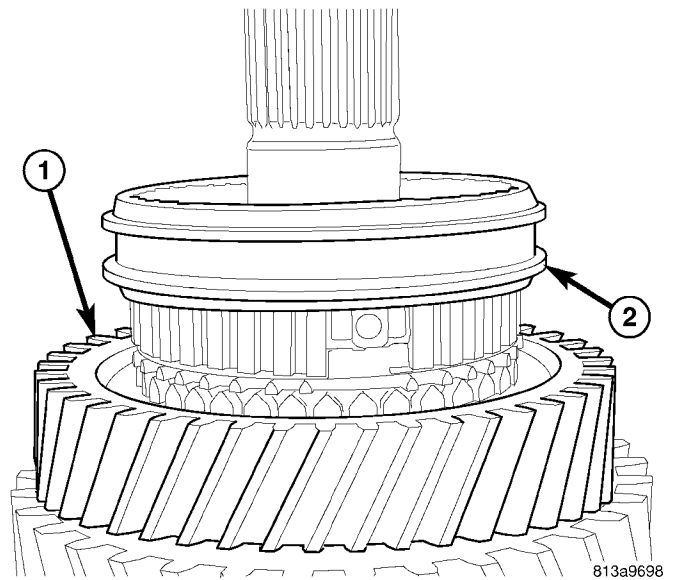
REVERSE GEAR SYNCHRO SLEEVE
